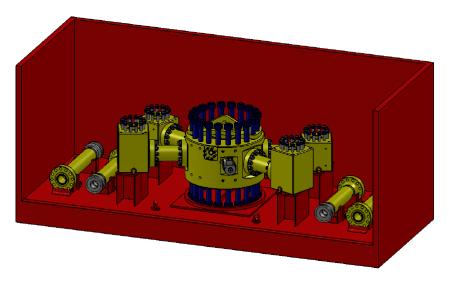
Diverter Spool Assembly with Four Inner Spools [4]
